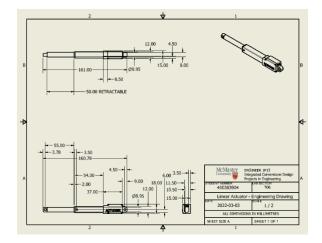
Fully dimensioned Engineering Drawing of the Linear Actuator Used
